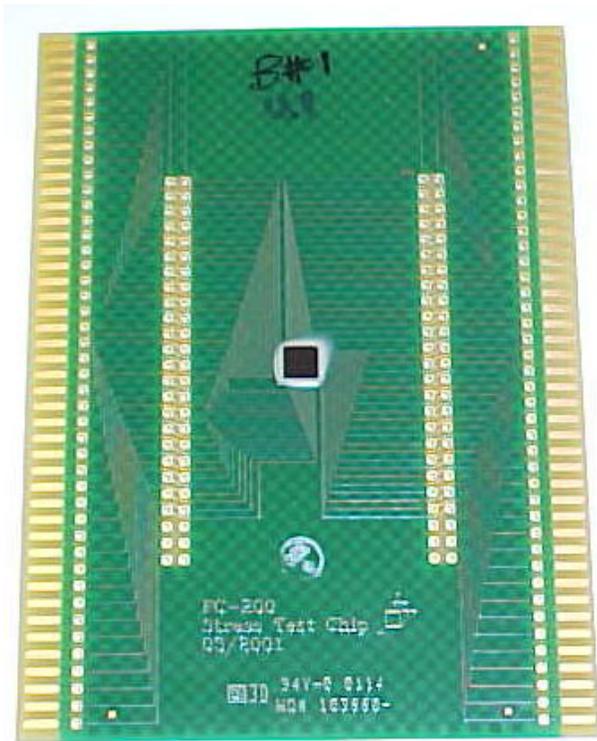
Photos of an Assembled Test Board and Test Chip
